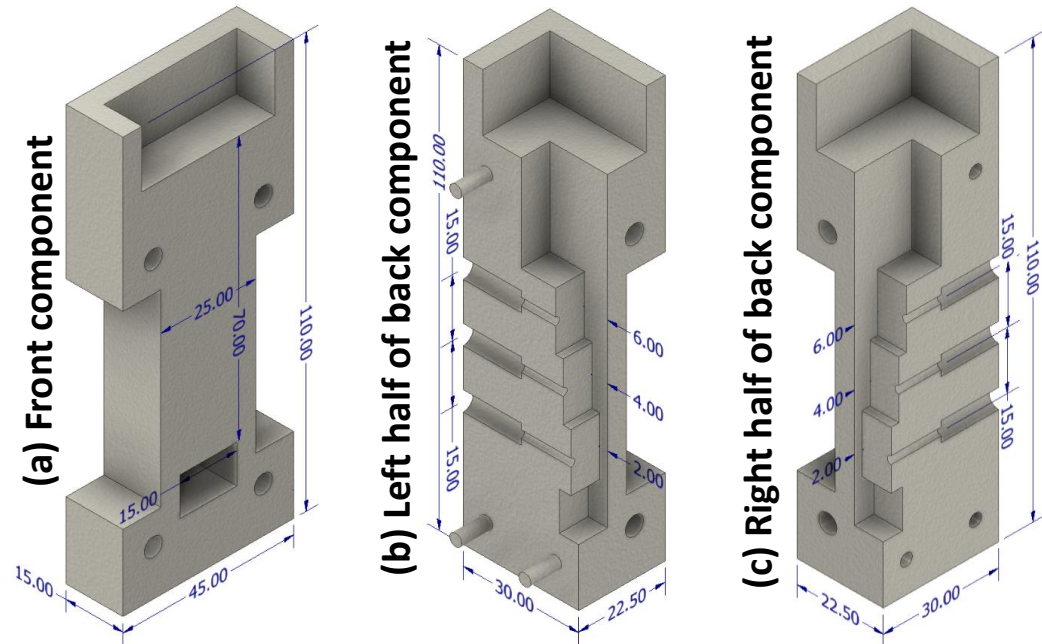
Flux mold specifications and dimensions. a) shows the dimensions of the front component, its interior has a smooth finish for good reflectivity. b) cross-section, left half of flux mold with the step profile. c) cross-section, right half of flux mold with the step profile.
